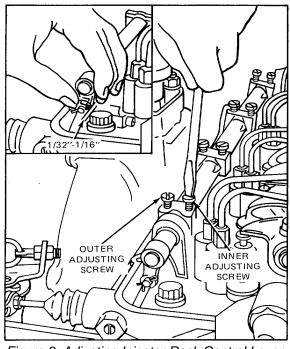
Adjusting Injector Rack Control Lever Adjusting Screws
